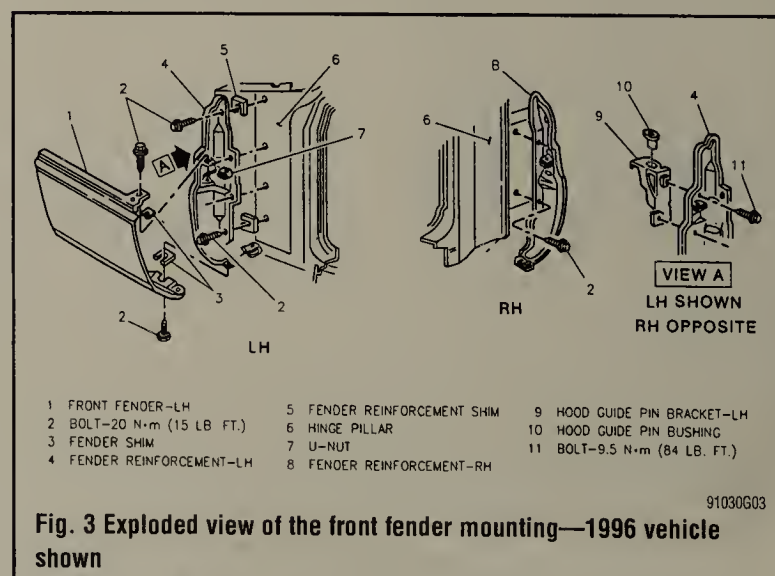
Exploded view of the front fender mounting—1996 vehicle shown
